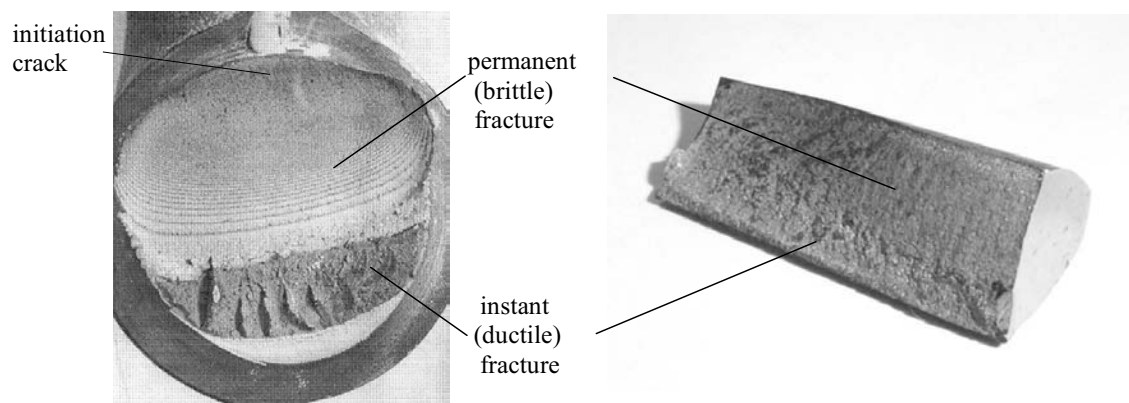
Appearance of fatigue fracture surface of an axis [4] and a gear tooth
